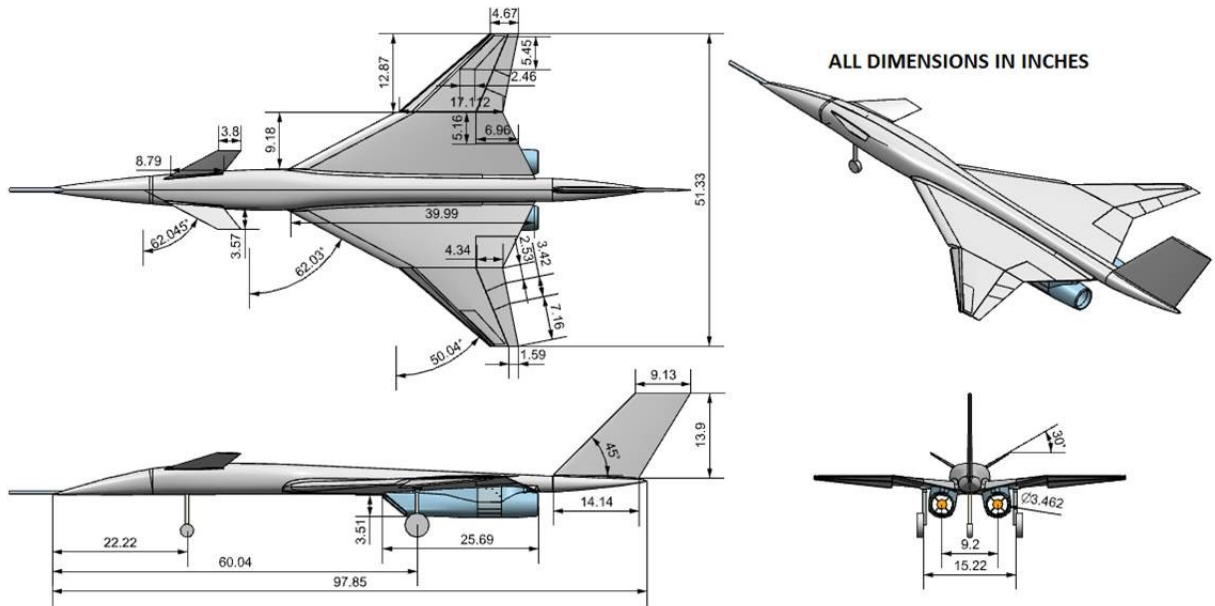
3-View Drawing of the 2014 UW STORM R-UAV
